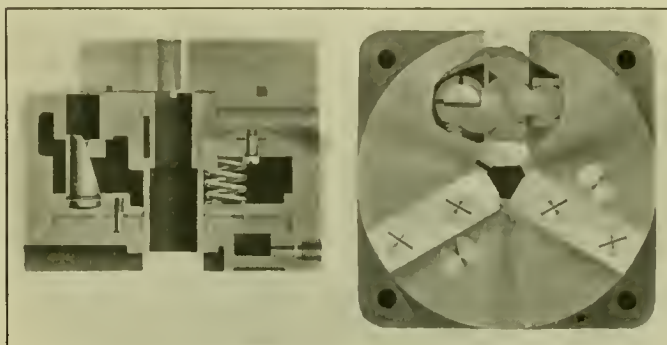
Pneumatic Chuck Used on Drilling Machines
